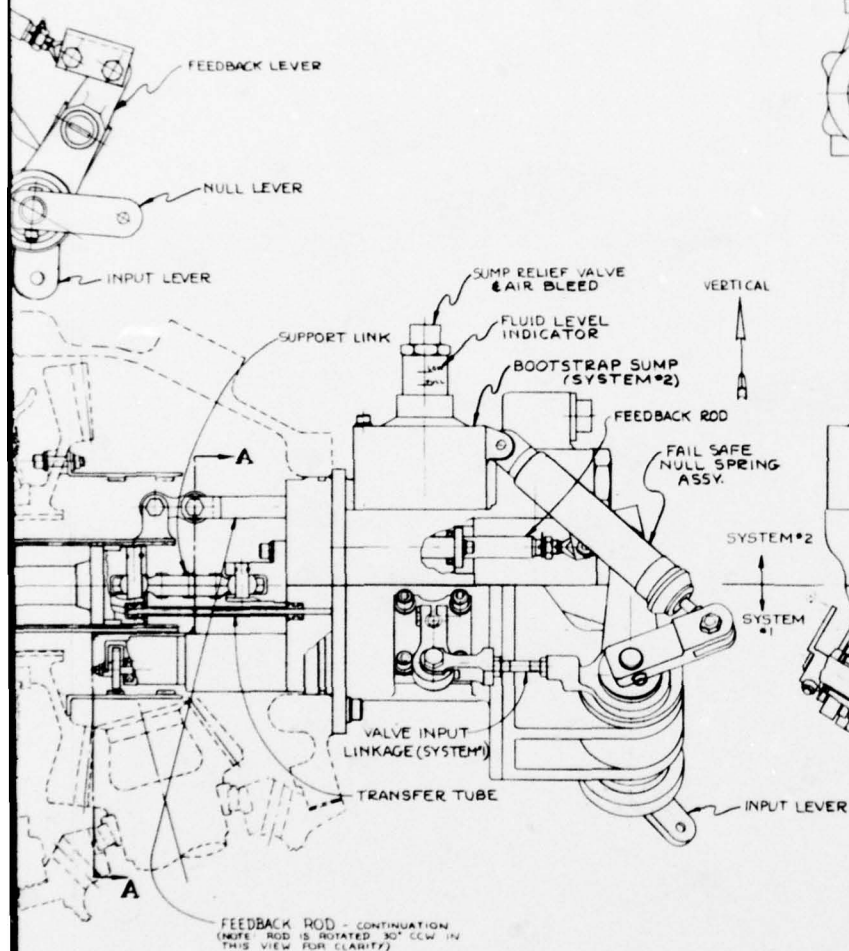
MECHANICAL INPUT INTEGRATED TAIL ROTOR SERVO ASSEMBLY.
